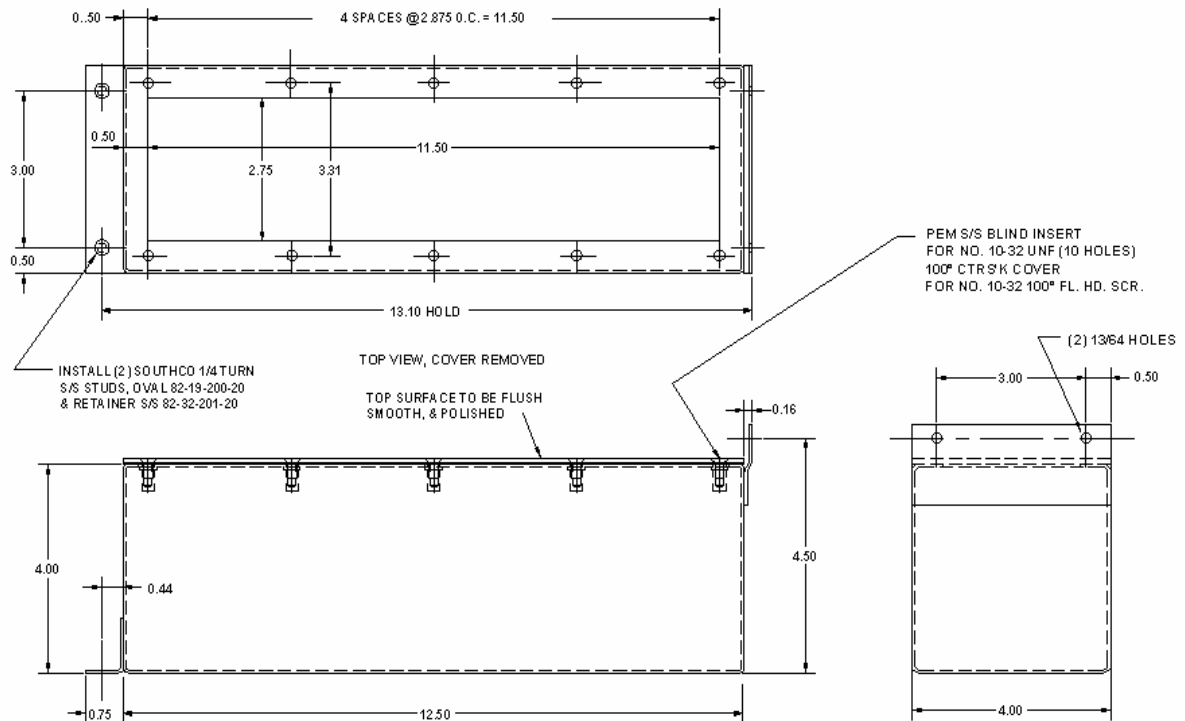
Mechanical drawing of FSIS Sensor Module. All drawing dimensions are in inches.
